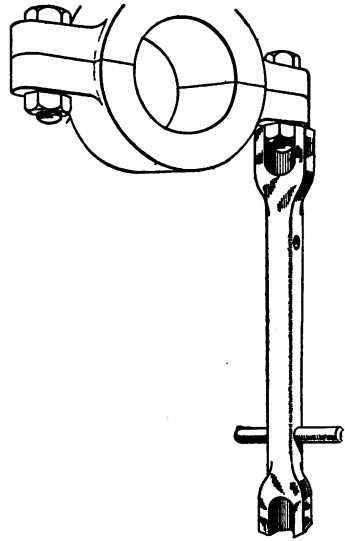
Semi-Socket Wrench for Crankshaft Bearing Nuts
